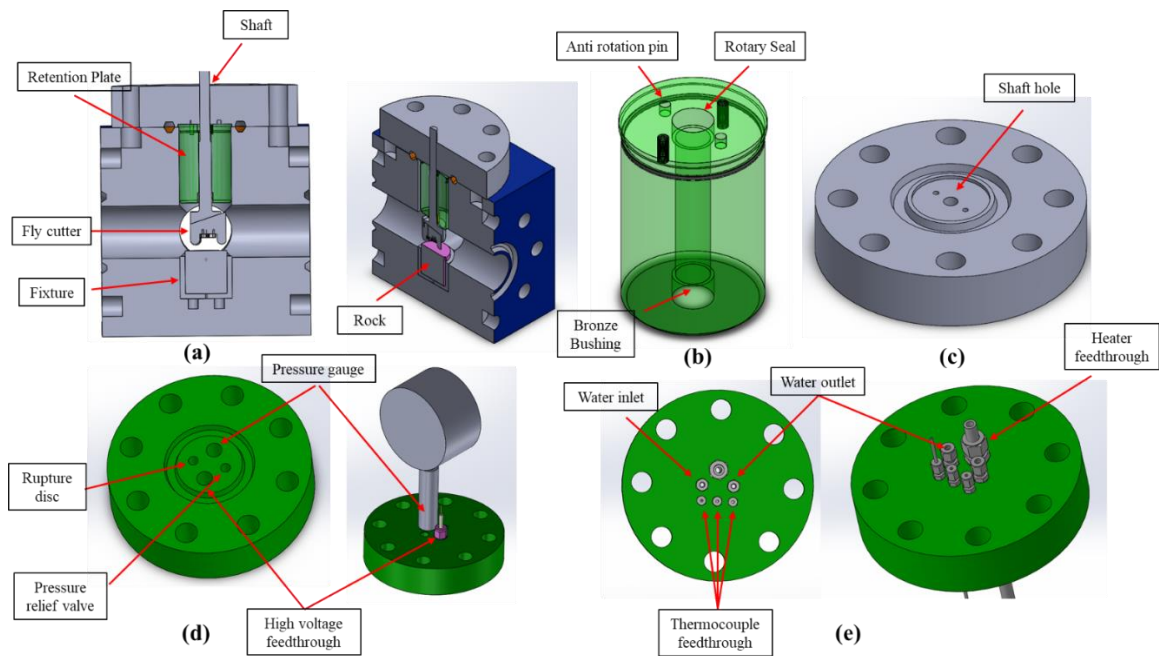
High pressure orthogonal cutting test components: (a) Sectional view of the high pressure test setup with internal components. The CAD model of the retention plate with rotary seal, bushing and O-ring groove (b). The CAD model of the top flange (c). CAD model of the side flange 2 and 3 with the instrumentation is shown in (d) and (e) respectively
